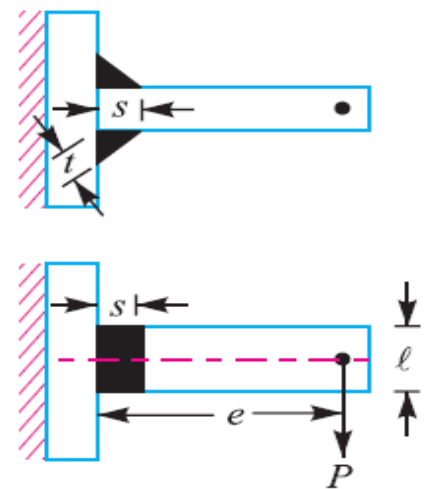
Eccentrically loaded welded joint.
